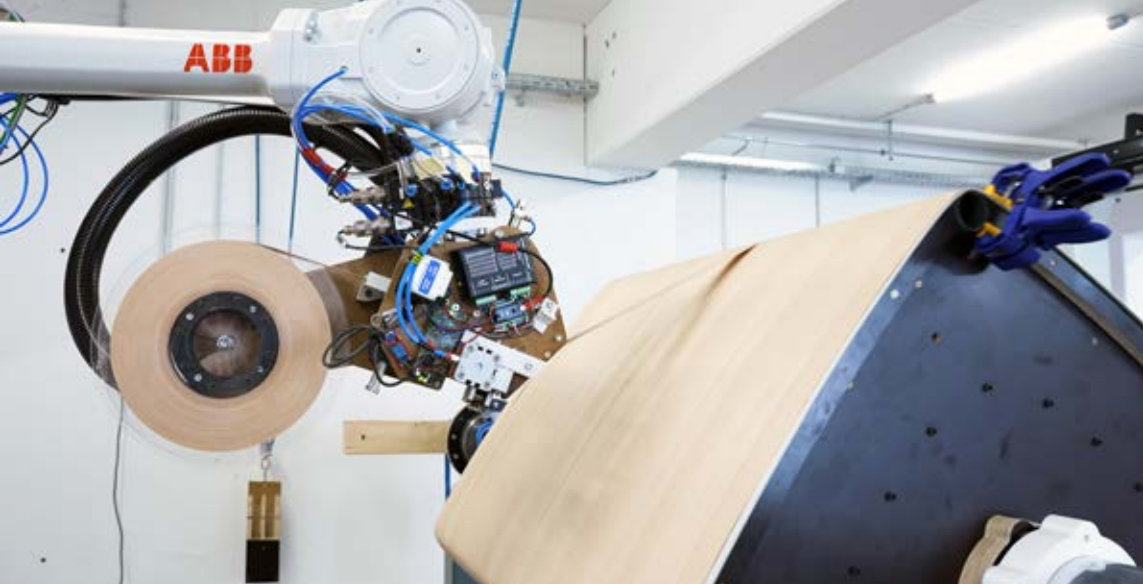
/7: Wood winding of ceiling components for an ultra-light building system designed for architectural extensions.
